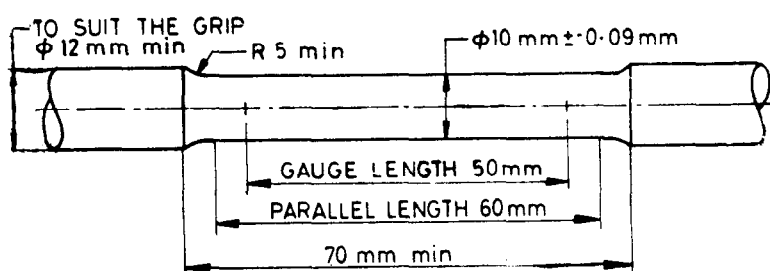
TENSILE TEST PIECE FOR SIZE 4 mm AND ABOVE
